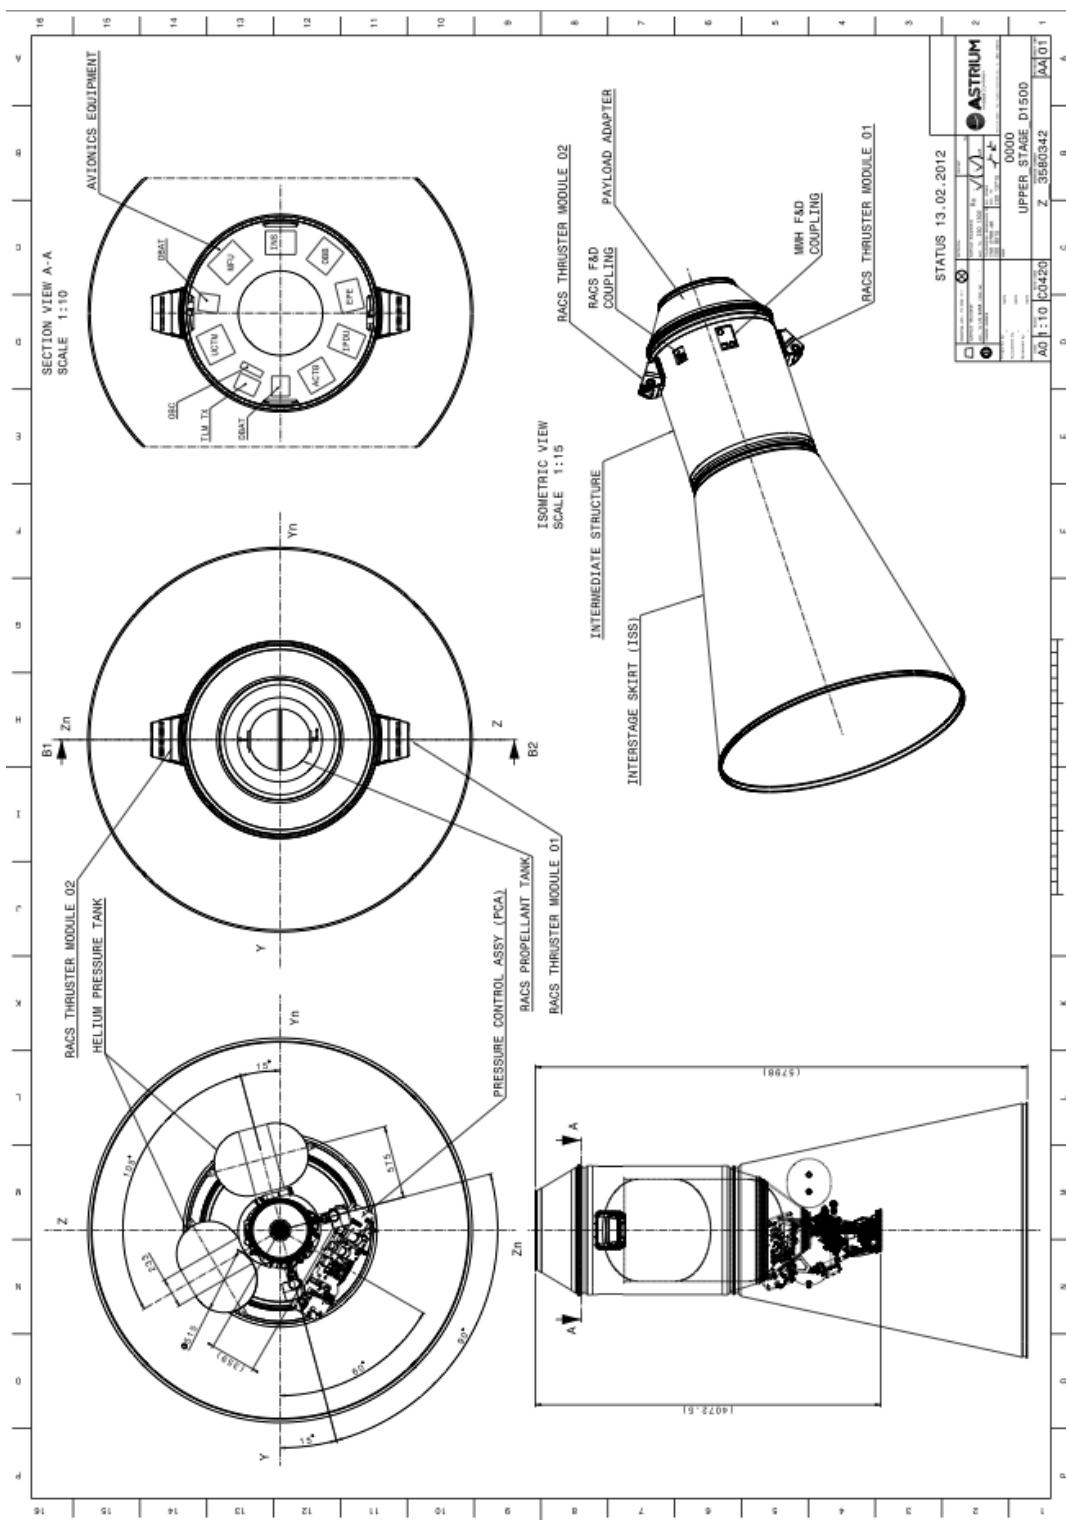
Upper stage technical drawing 1, 2-stage launcher
